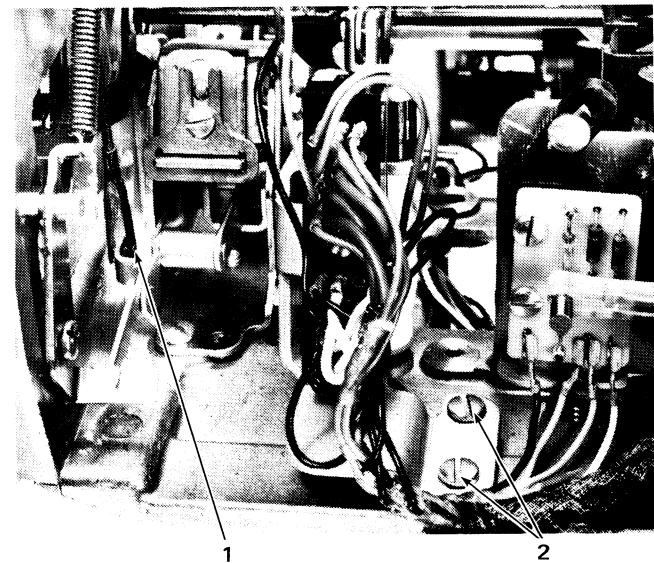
Index Magnet Assembly Removal (Rear of Printer)
